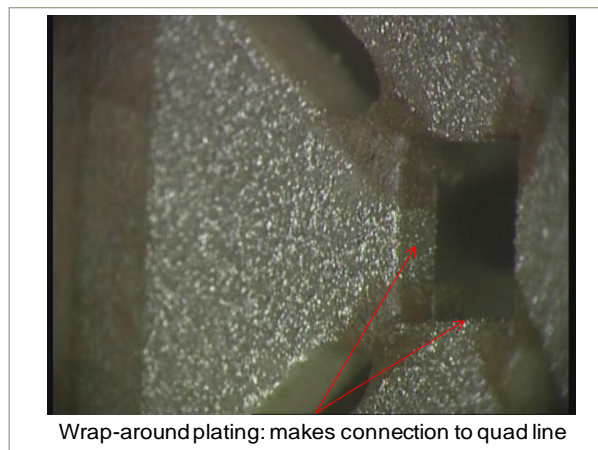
Close-up: injection molded, silver epoxy spray plated Gen 2.0 droopy bowtie radiator
